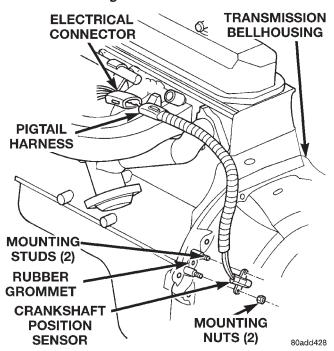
Crankshaft Position Sensor—2.5L 4-Cyl. Engine—Auto. Trans.
